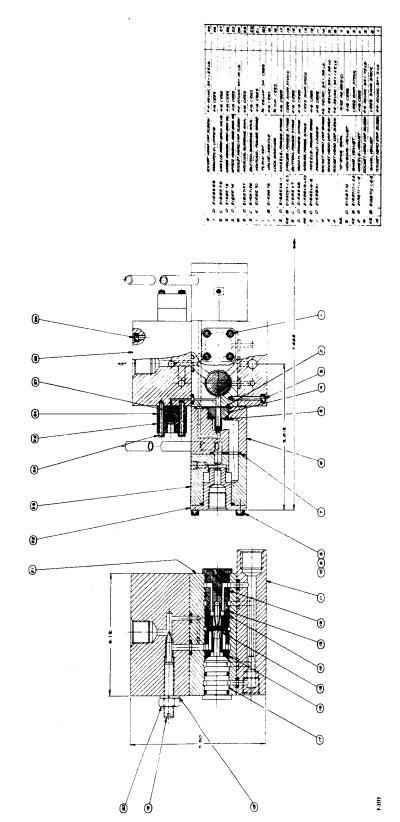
Layout Assembly Drawing of Breadboard Model Flueric Servovalve
